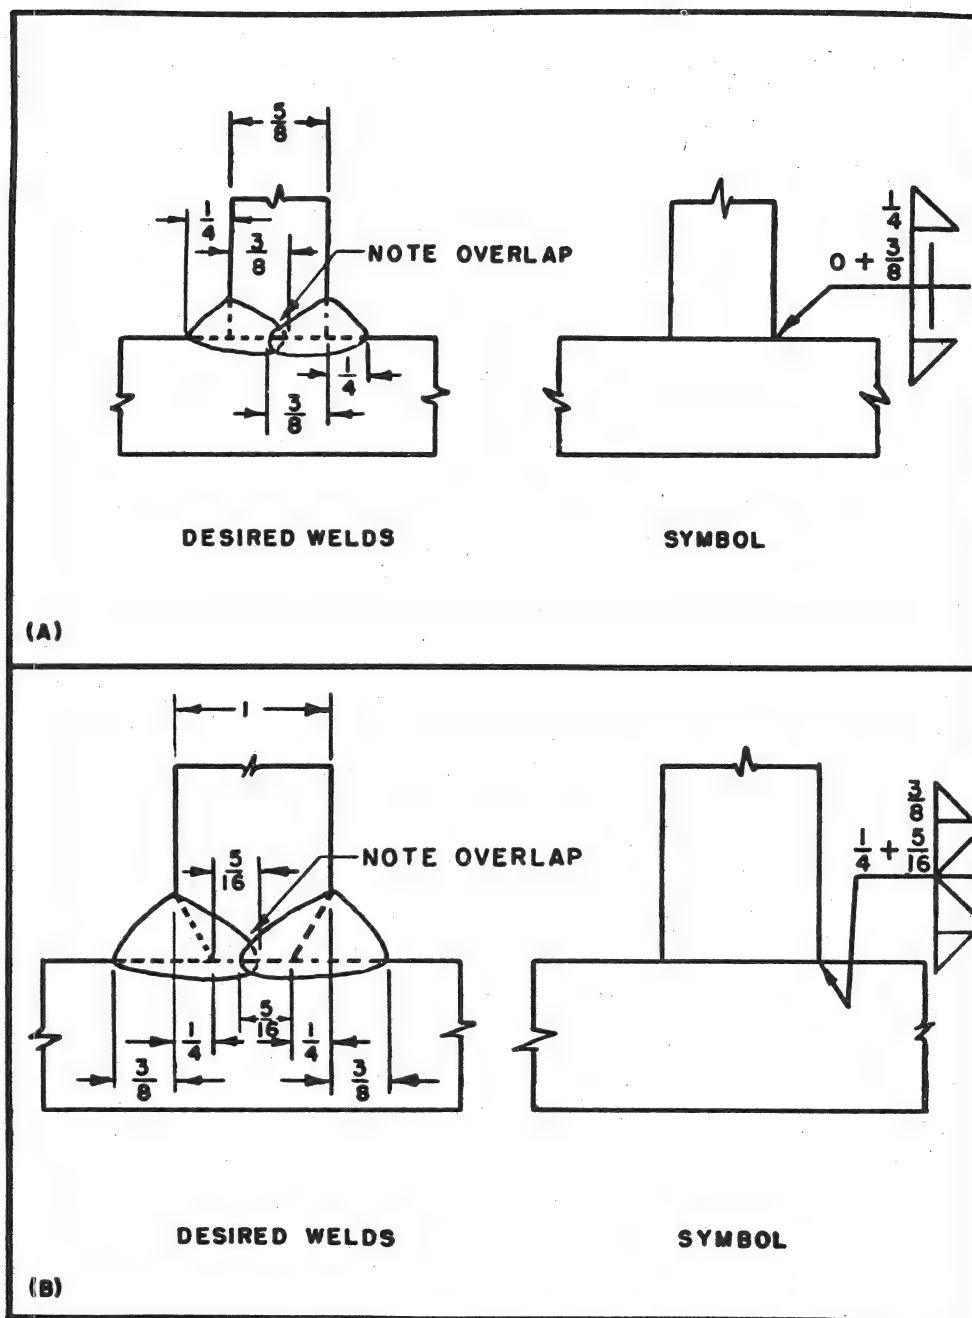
Designation of Size of Combined Welds with Specified Root Penetration
